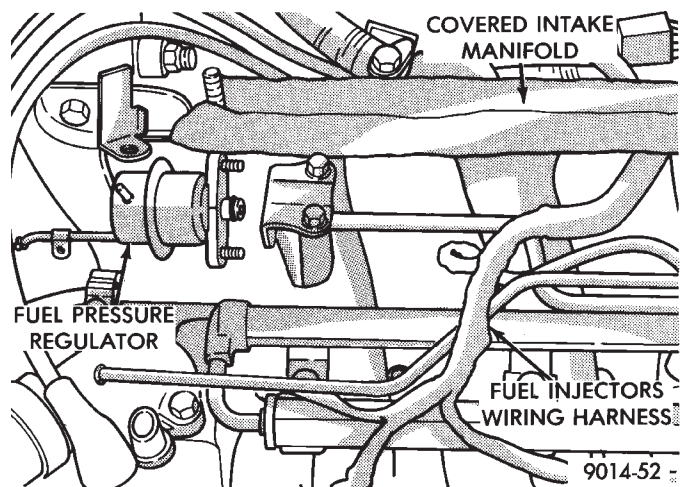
Fuel Pressure Regulator to Fuel Rail Assembly
